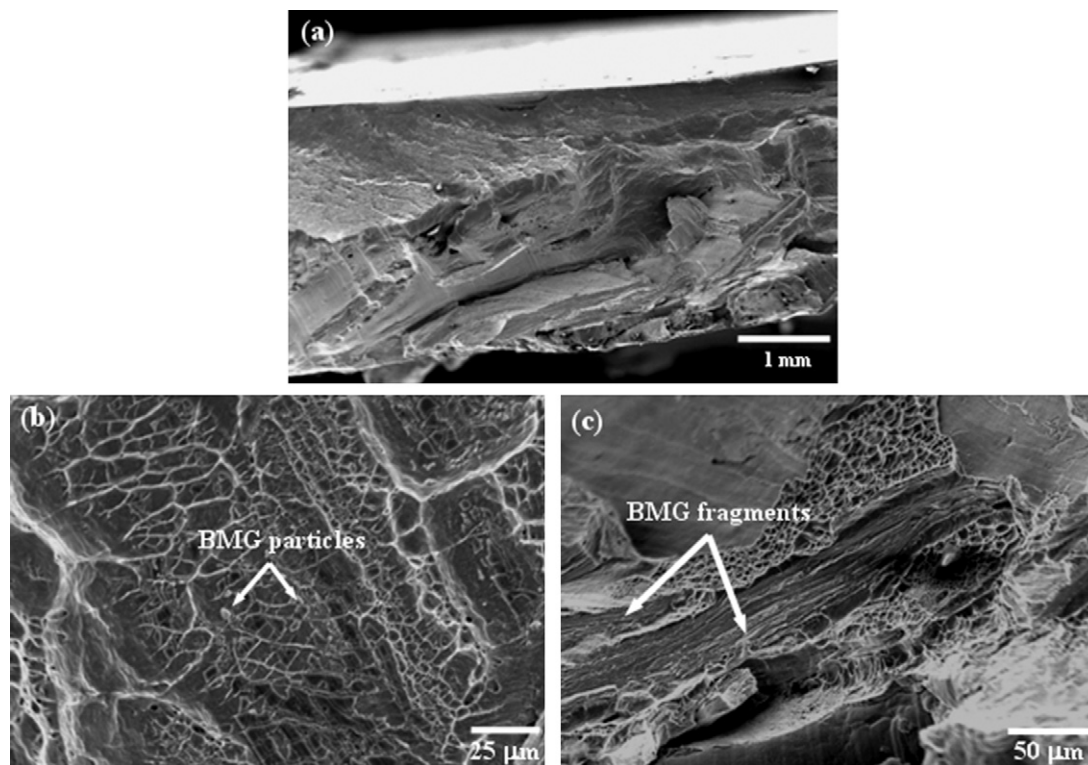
SEM images showing the tensile fracture surfaces of the BMG/copper joint (a) macro-view of the fracture surface; (b) magnified view showing the BMG particles on the fractured plane; (c) magnified view showing the strip-like BMG fragments on the fractured plane.
